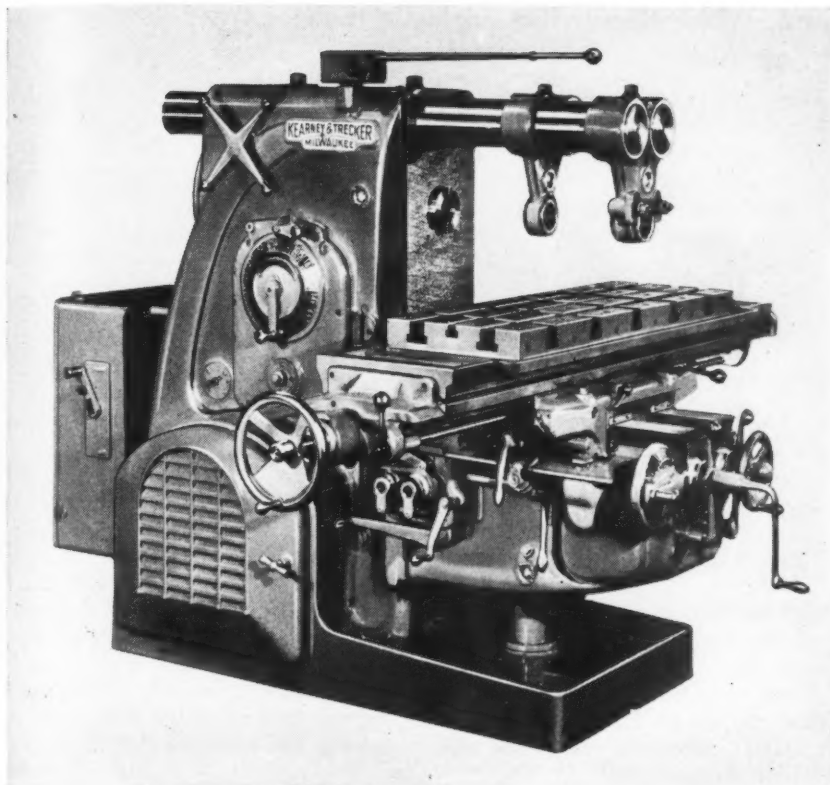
Kearney & Trecker plain milling machine with recently developed chucking table
